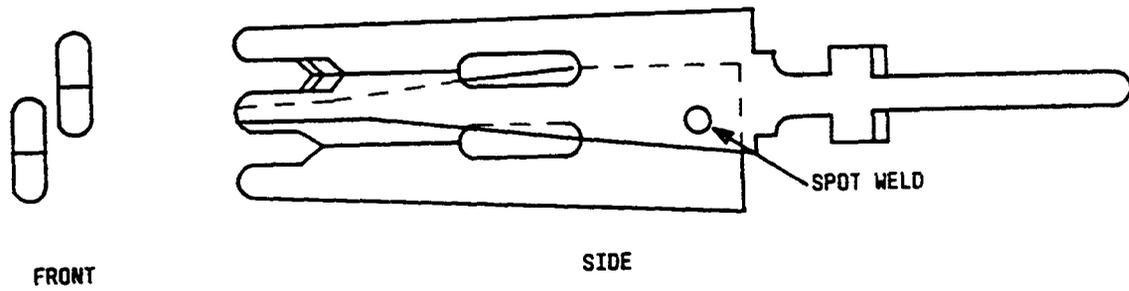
Views of Terminal Used on 78C-Type Connecting Blocks
